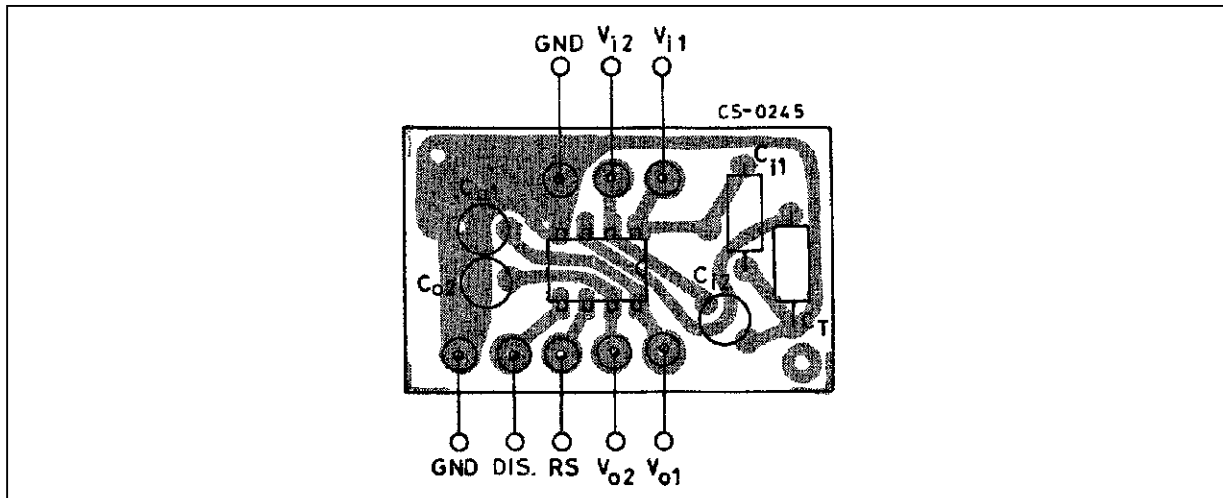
P.C. Board and Components Layout of the Test Circuit
